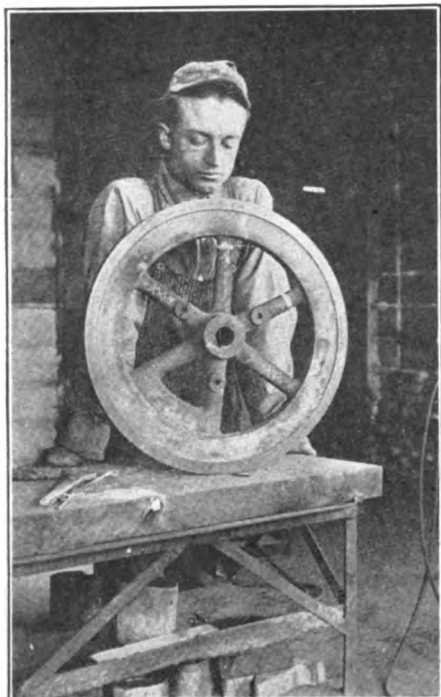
SHOWING THE LOCATION OF THE FRACTURE
